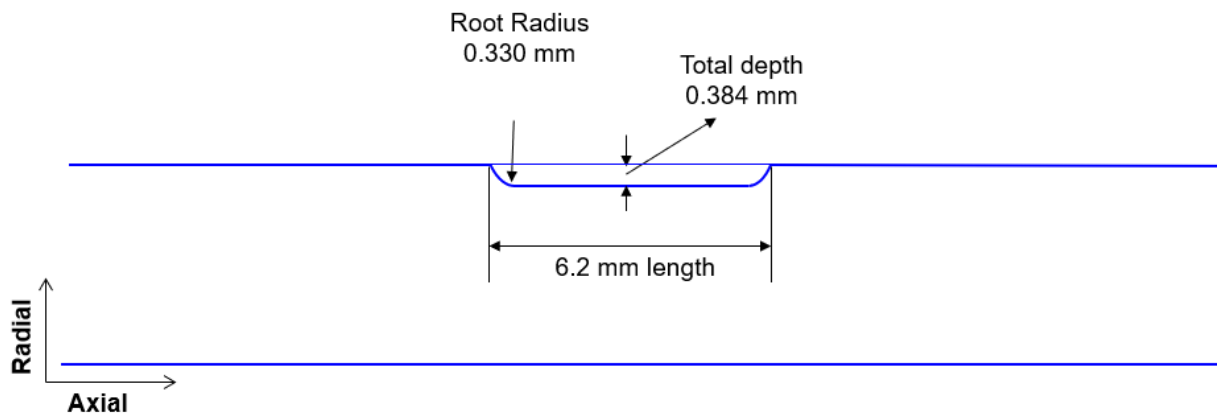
CWEST Scrape Flaw Geometry in the Radial-Circumferential Plane of the Pressure Tube (Section A-A of Figure 3-2)
